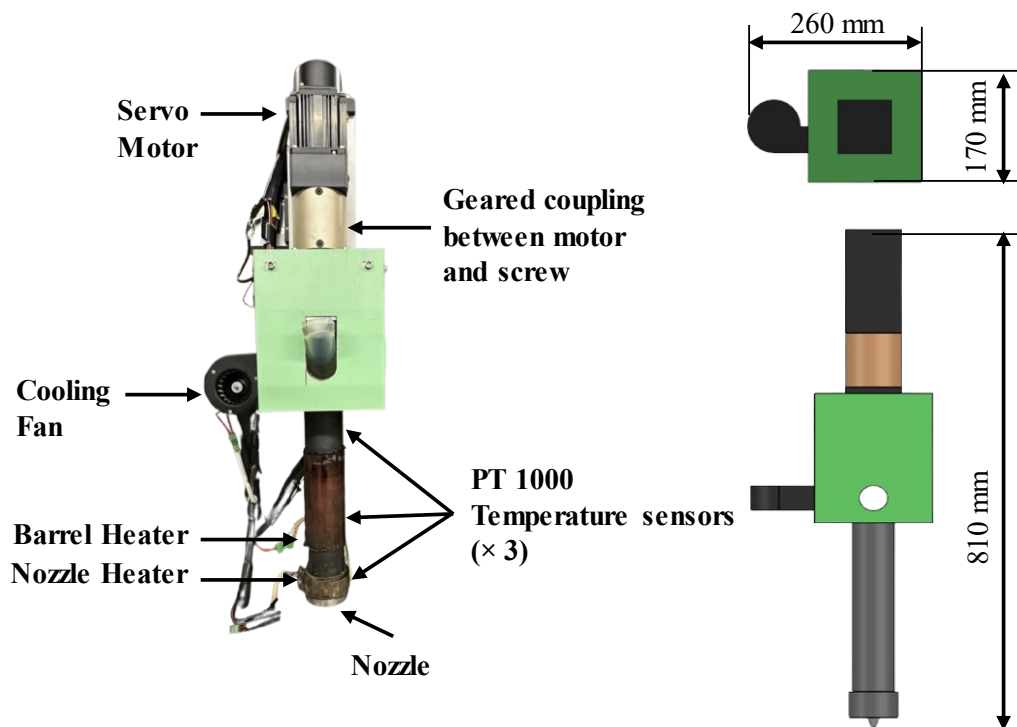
SJ-35 FGF pellet-fed print head's components and overall dimensions
